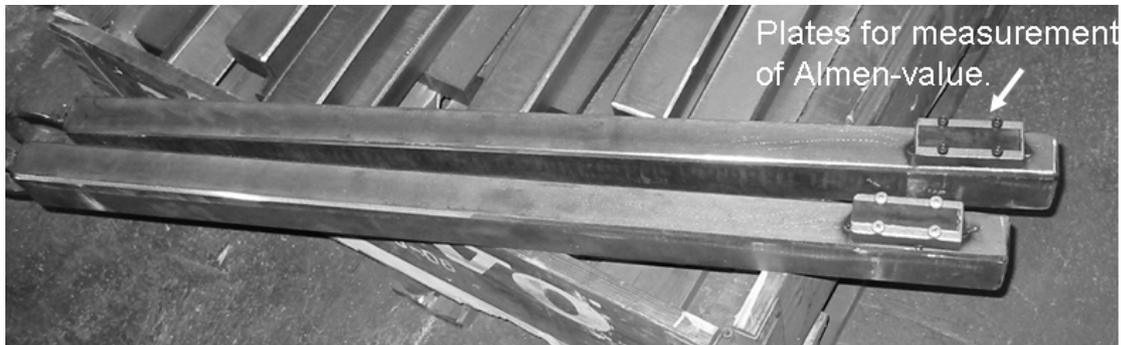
Gas cut beams produced at Volvo CE for fatigue testing.
